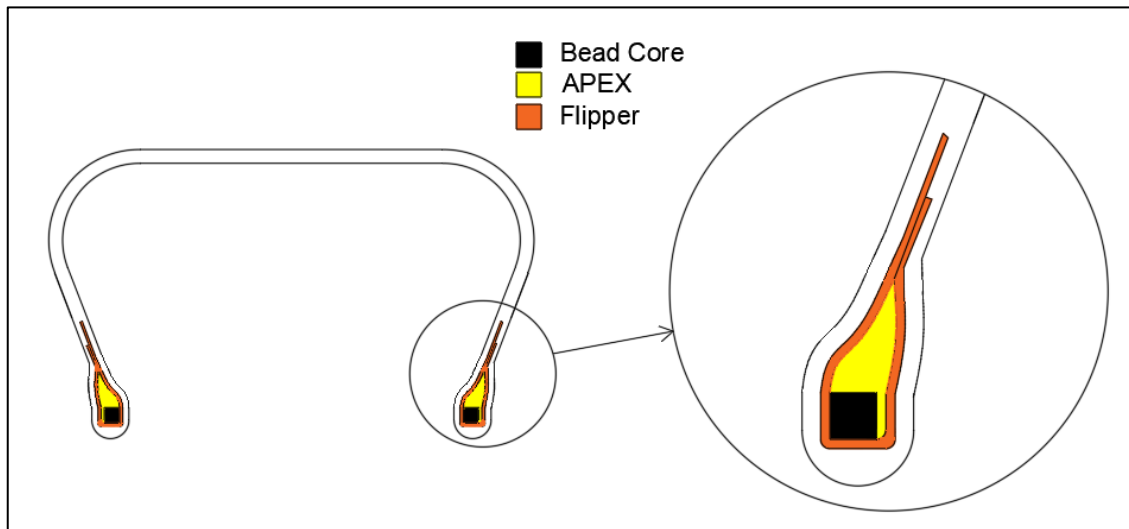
Sectional drawing of a tyre; highlight to bead, apex and flipper.
